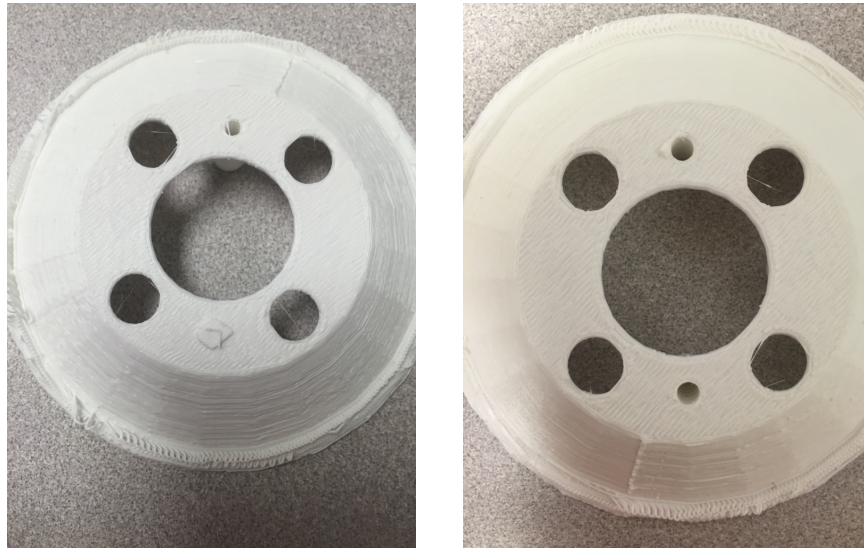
Before and after drilling out the holes in the solar shield bottom plates to make it easier to feed bolts through.
